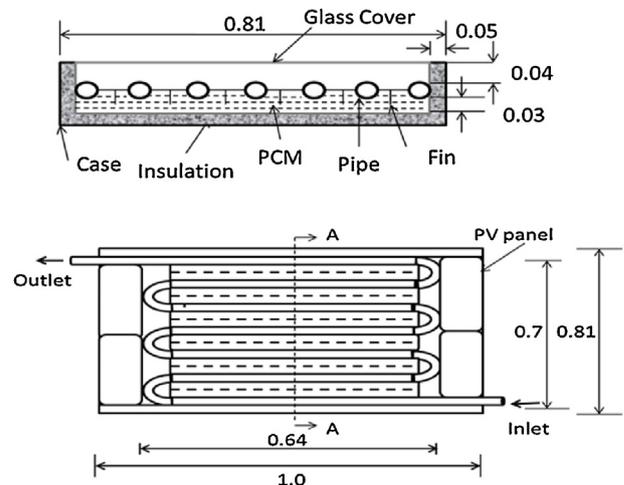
Sectional view (top) and top view (bottom) of the PVT solar collector system with various dimensions (dimensions in m) used in this study.
